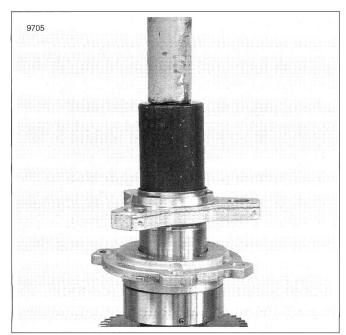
Output Shaft Nut Lock Ring -Shaft Out of Engine
